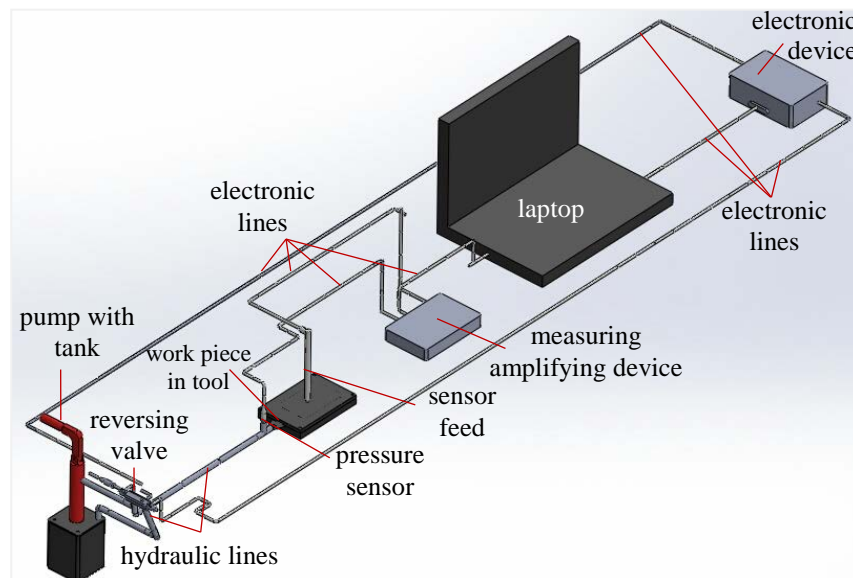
Model of mechatronic system for hydroforming of welded sheets [8]
